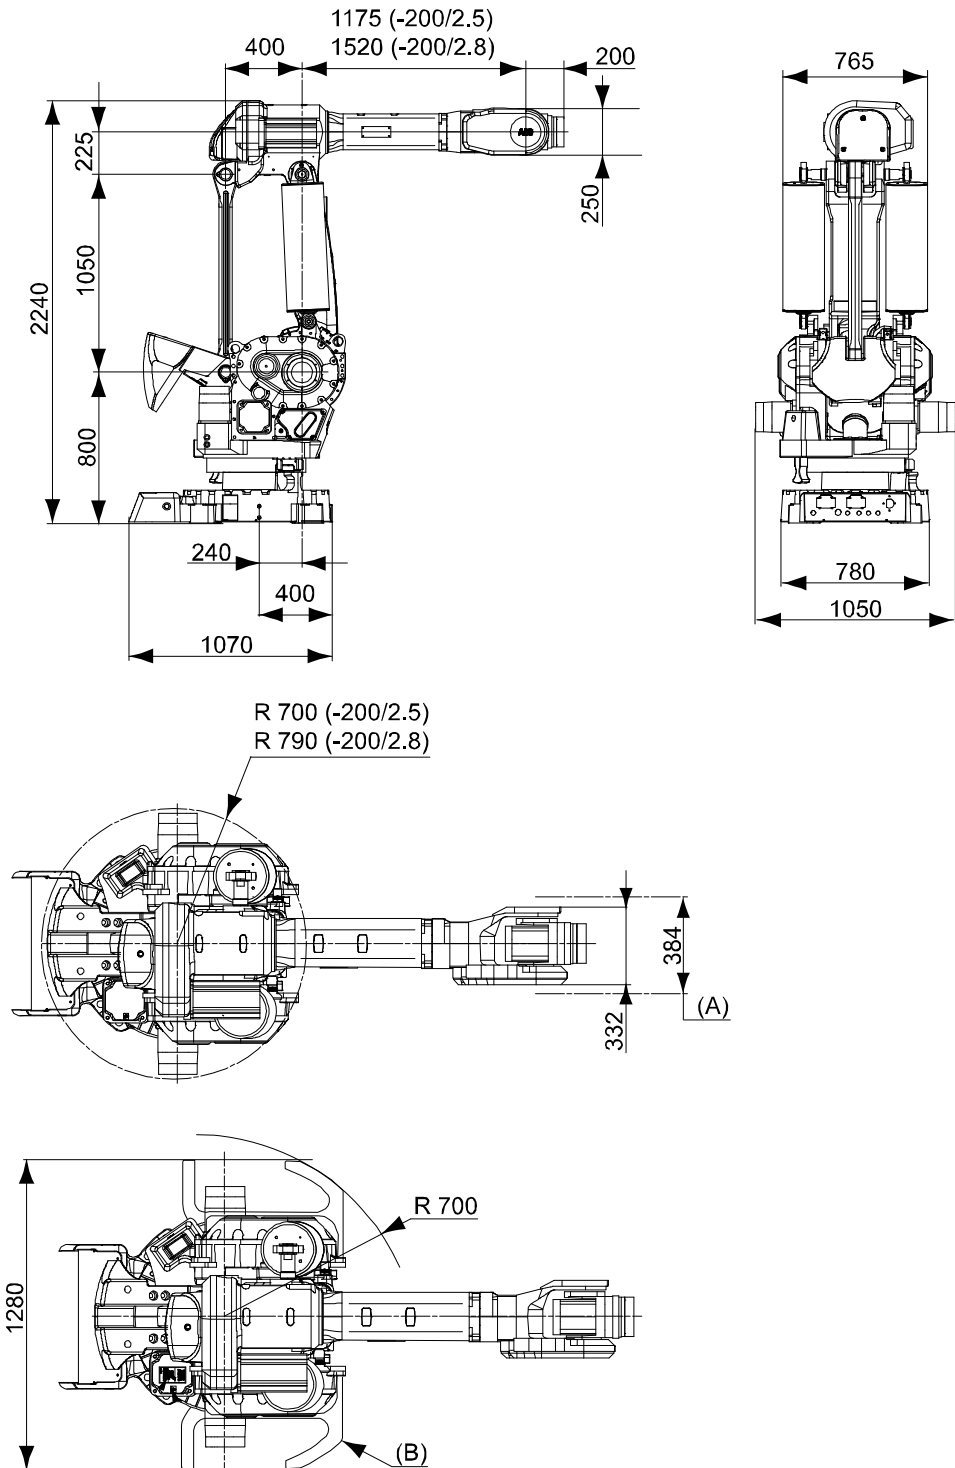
View of the manipulator from the side, rear and above (dimensions in mm).
